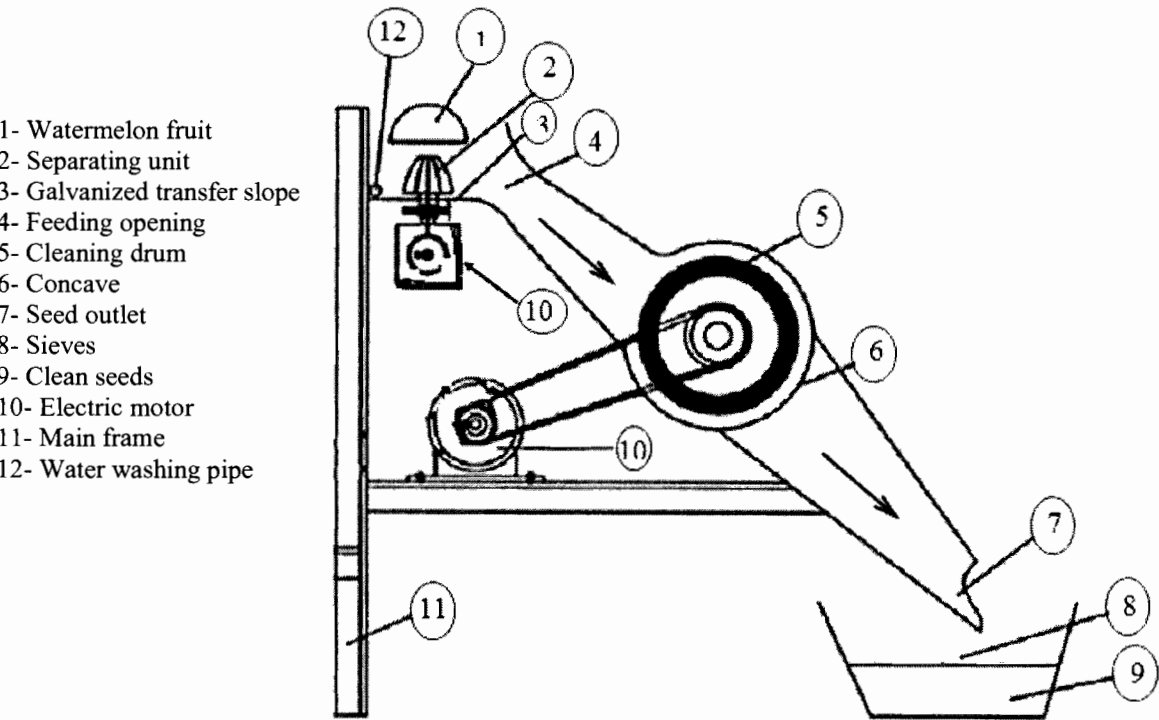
A schematic diagram of the extracted seeds path through extracting machine
